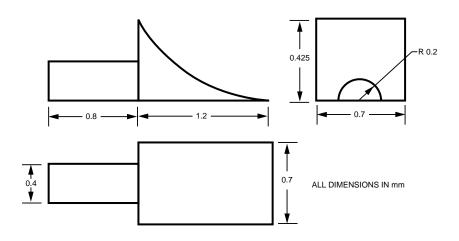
HSDL-36xx Front Mount Castellation Solder Fillet Model.
